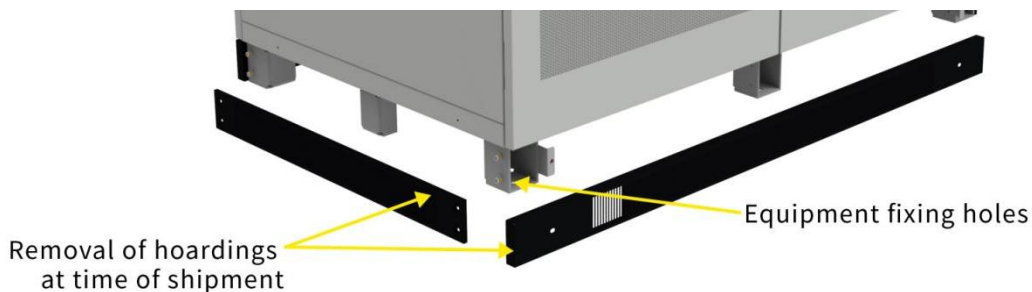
Equipment bottom enclosure preparation and bolt fastening diagram
